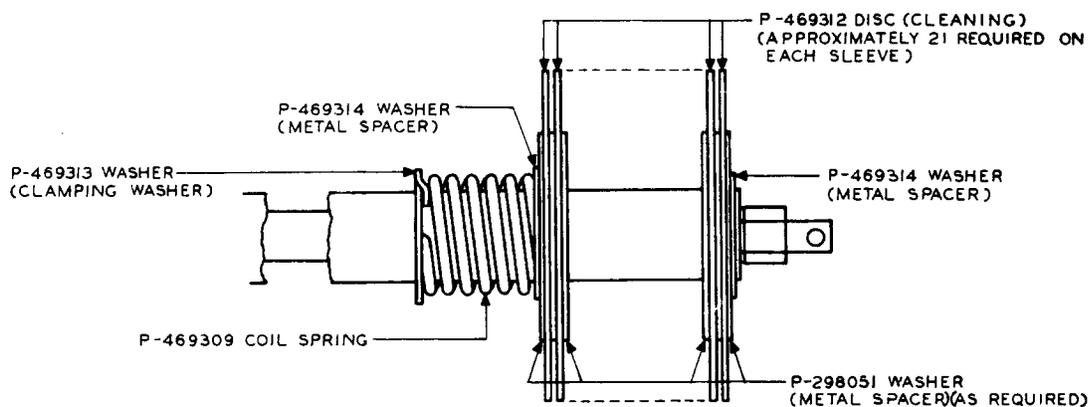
Cleaning Discs, Coil Spring, and Associated Washers
